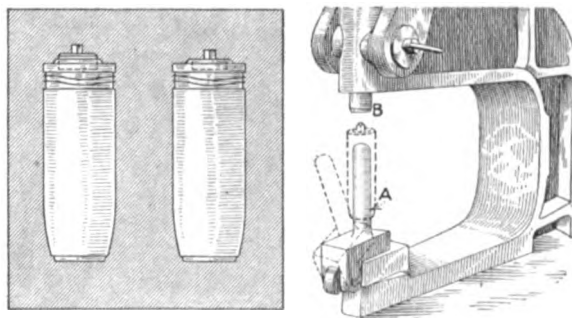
DIES FOR BASE PLATE, 4.5-IN. HOWITZER HIGH-EXPLOSIVE SHELL
